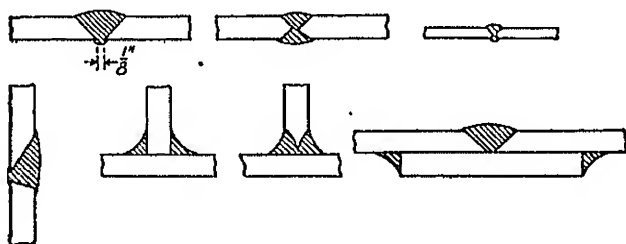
Typical Arc-weld Scarfs.
